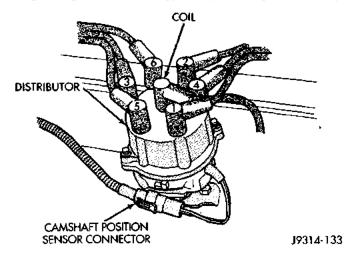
Distributor and Wiring—Typical (4.0L Engine Shown)
